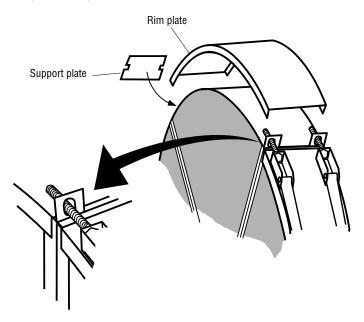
5. Fit rim plates and support plates. Ensure that the rim plates fit over the edges of the rotor sectors and that they rest on the flange edges of the spokes.
